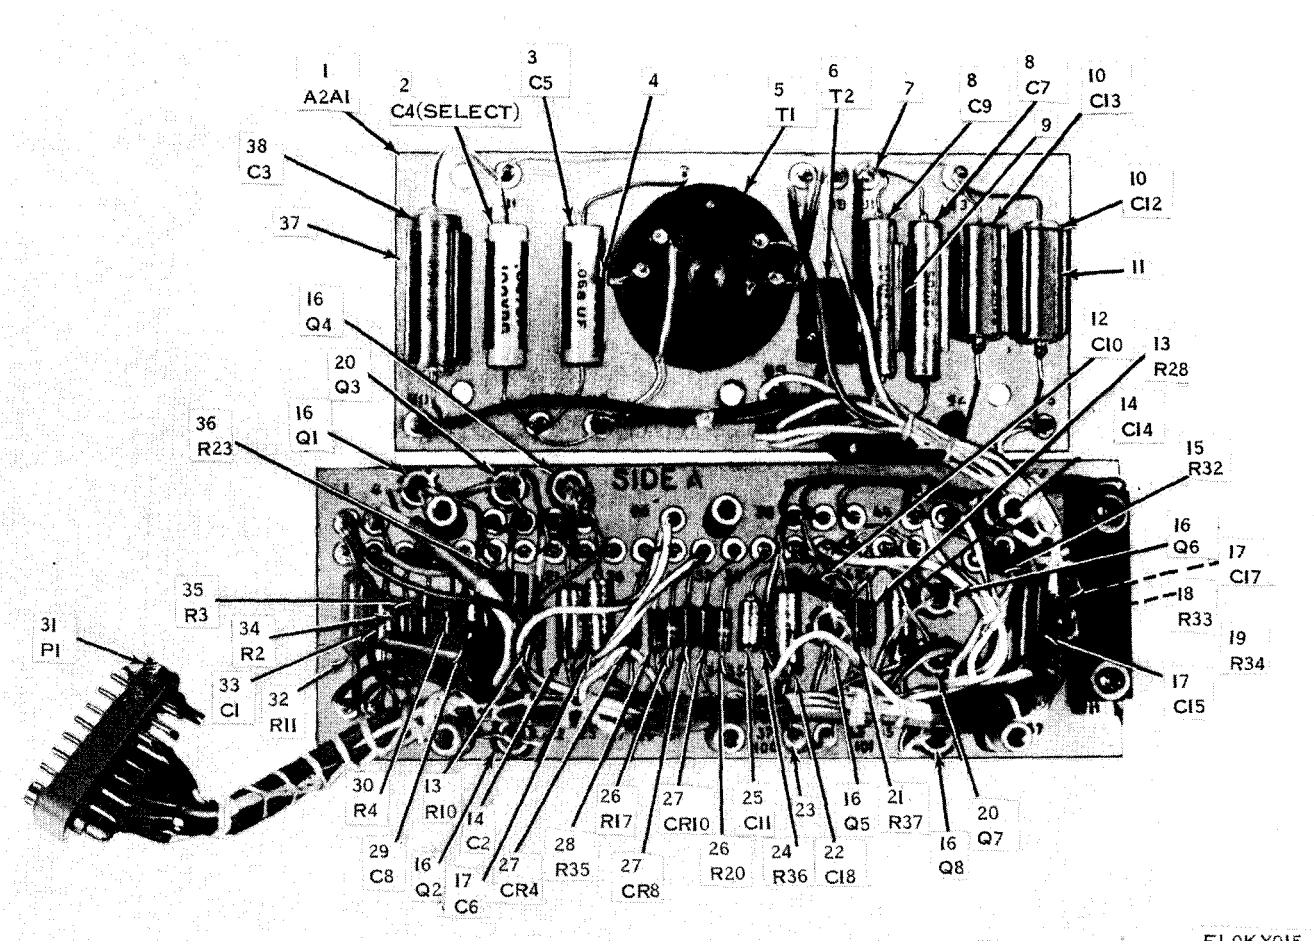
① Amplifier, electronic control assembly A2, CN-998/ASN-43 and CN-998A/ASN-43 (sheet 1 of 2).
